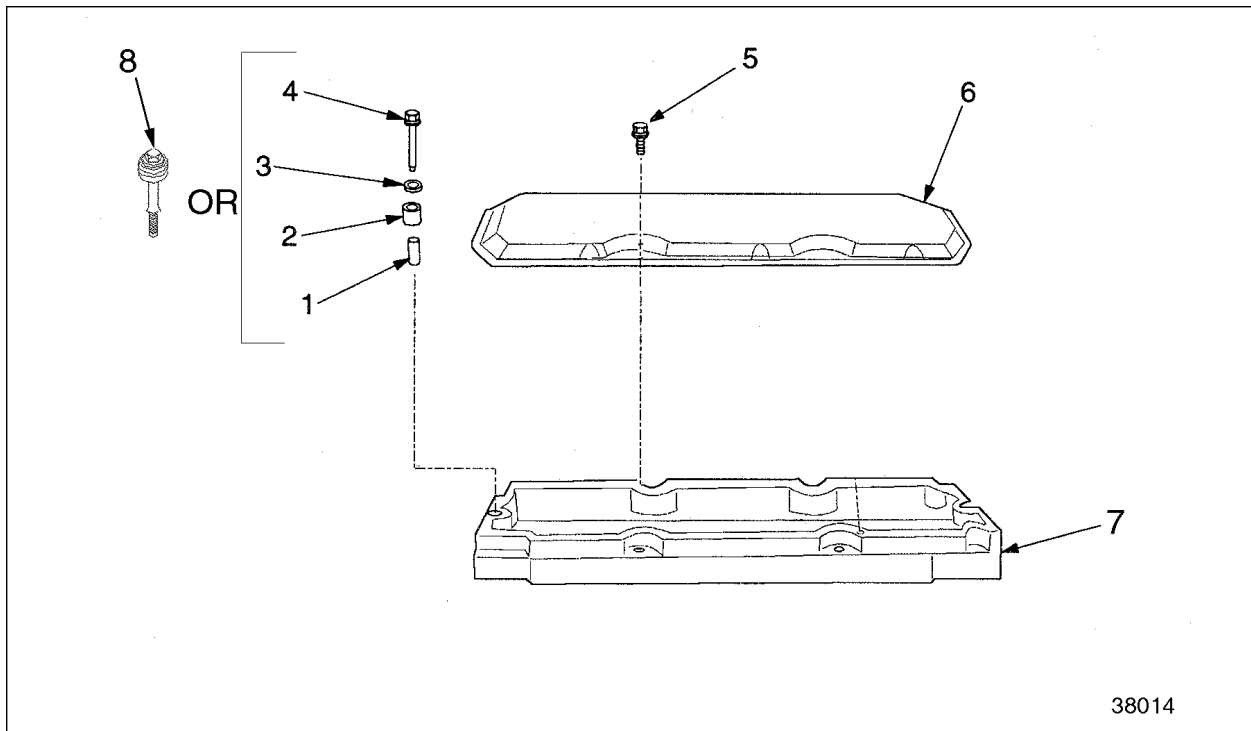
One-Piece Rocker Cover - Series 60 Diesel Engine
